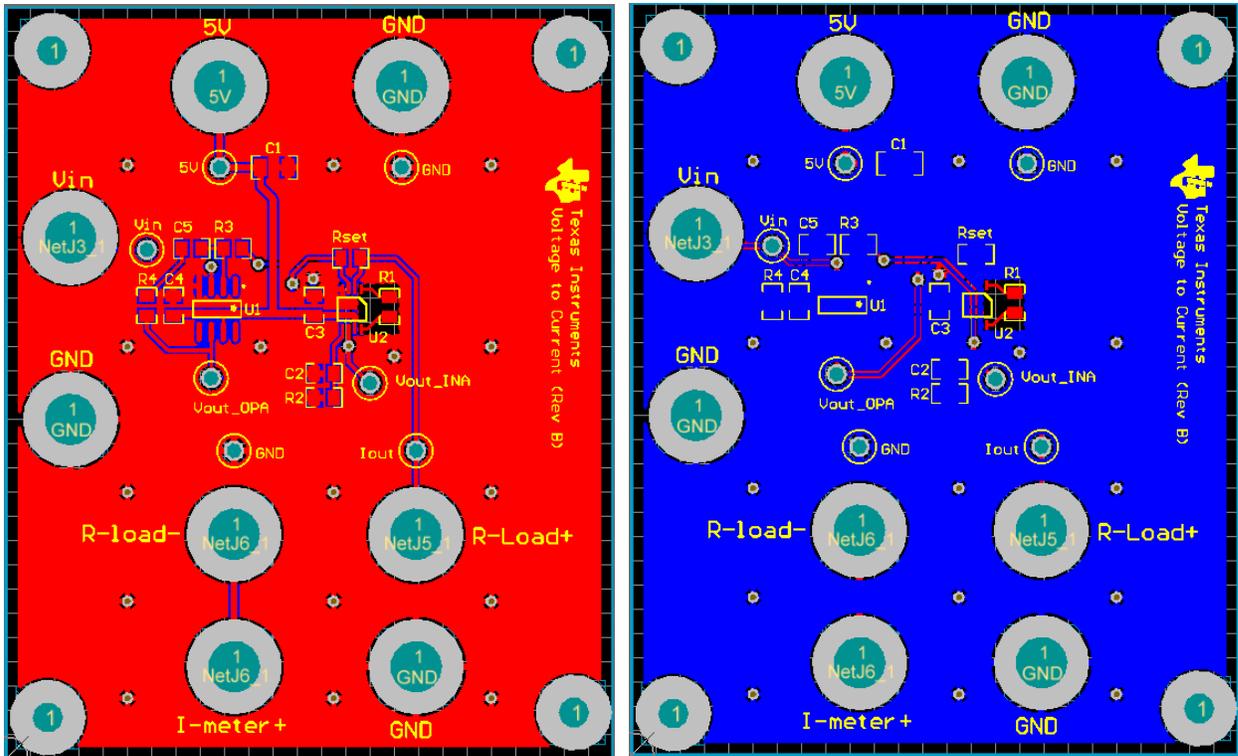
PCB Layout (Top on Left, Bottom on Right)
